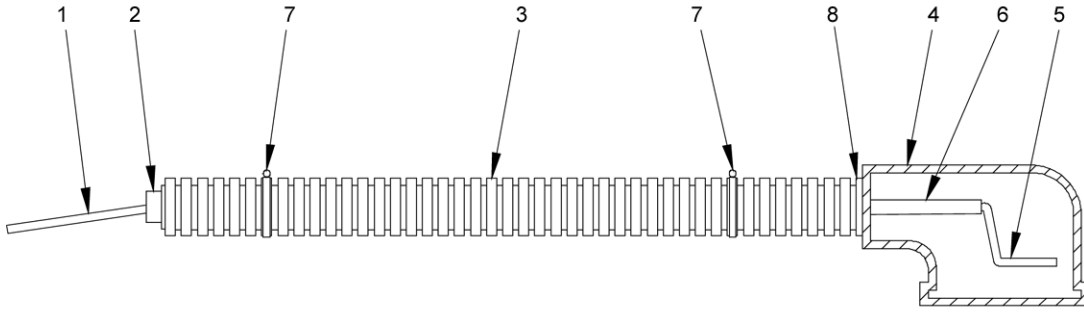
Preheater Lead Assembly (MEP-531A/501A).
